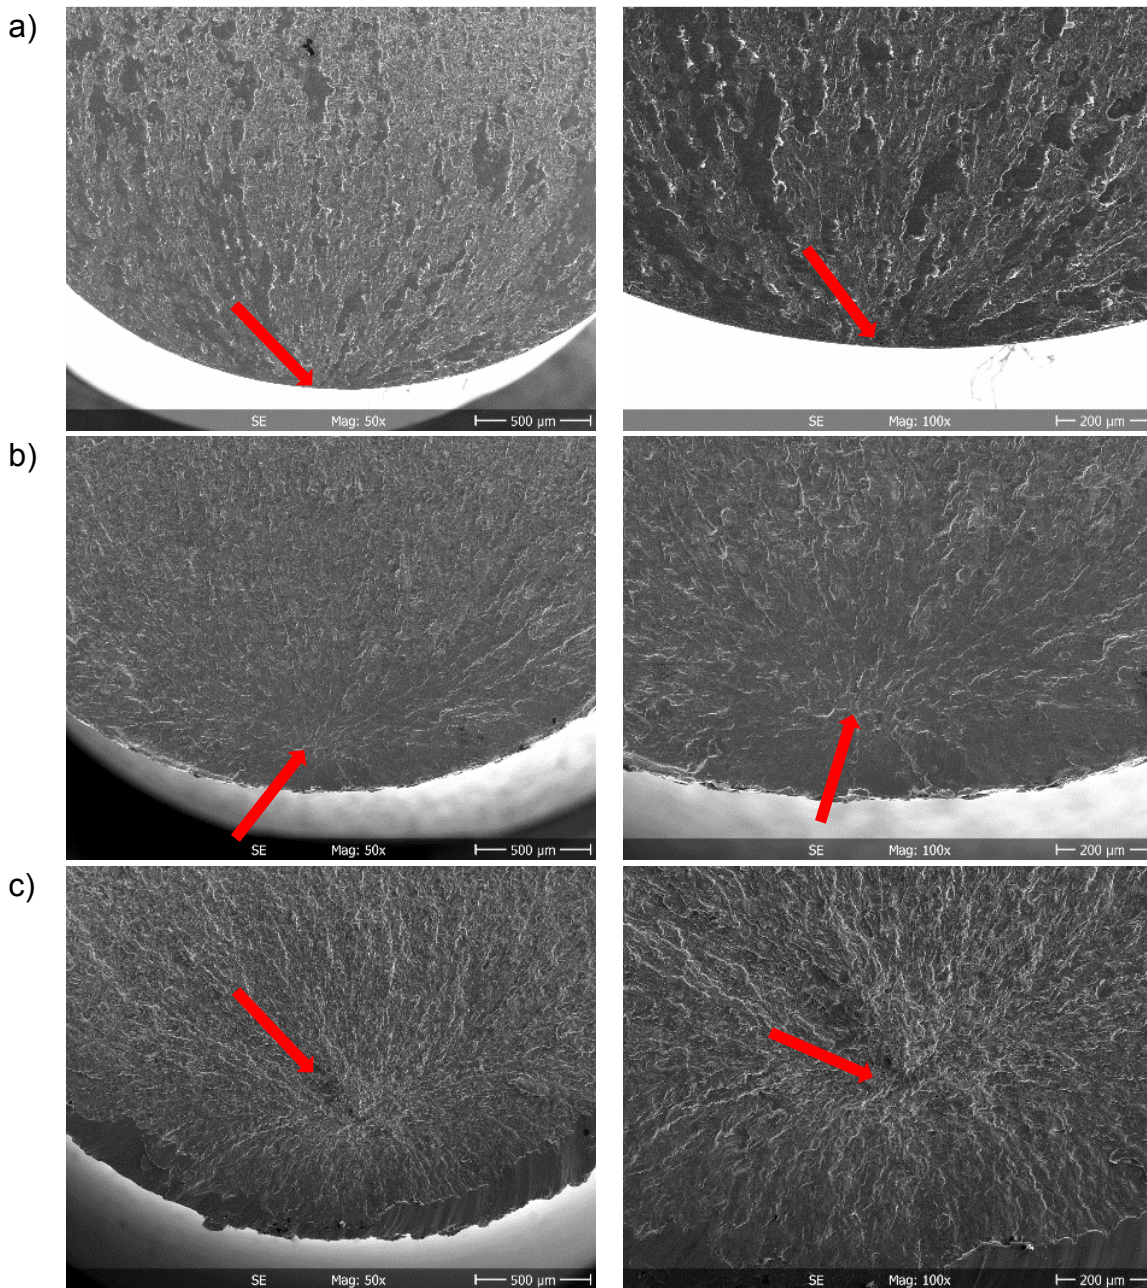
Fracture surfaces of fatigue failed Ti-6242 weld joints of a) PWHT EP, b) PWHT SP and c) PWHT RB. (Arrow indicates crack nucleation site) larger magnification right to the fracture pattern.
